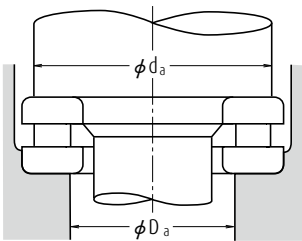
Face Supporting Diameters for Thrust Roller Bearings
